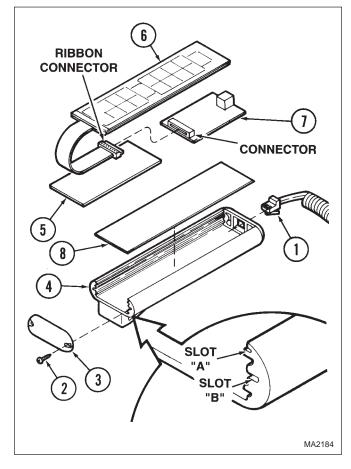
Hand Control Panel or Interface Board Removal / Installation
